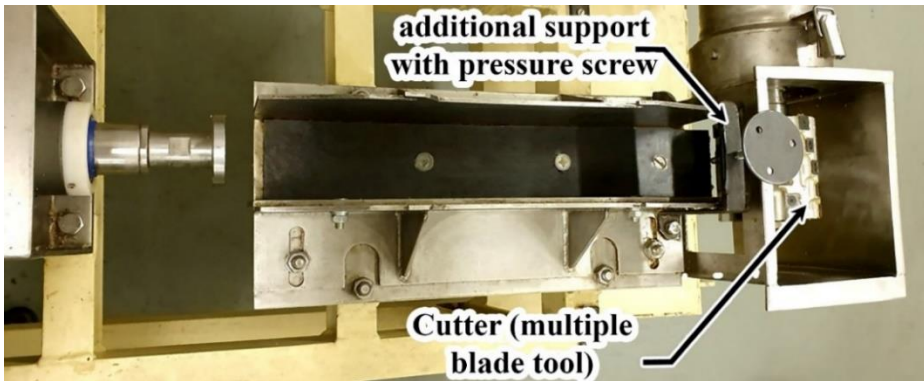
General view of the chopper guide chute structure before retrofitting (top cover removed).
